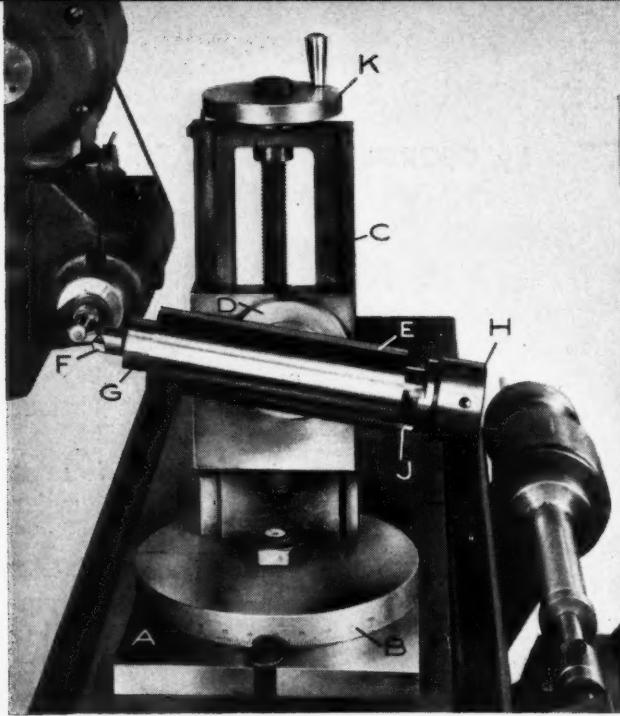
A compound work-holding head for internal form-grinding of spiral form tools
